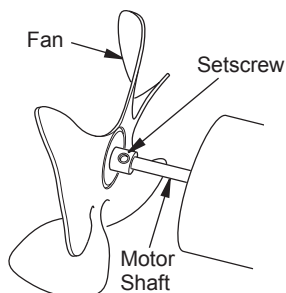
Fan, Motor Shaft, and Setscrew Location
